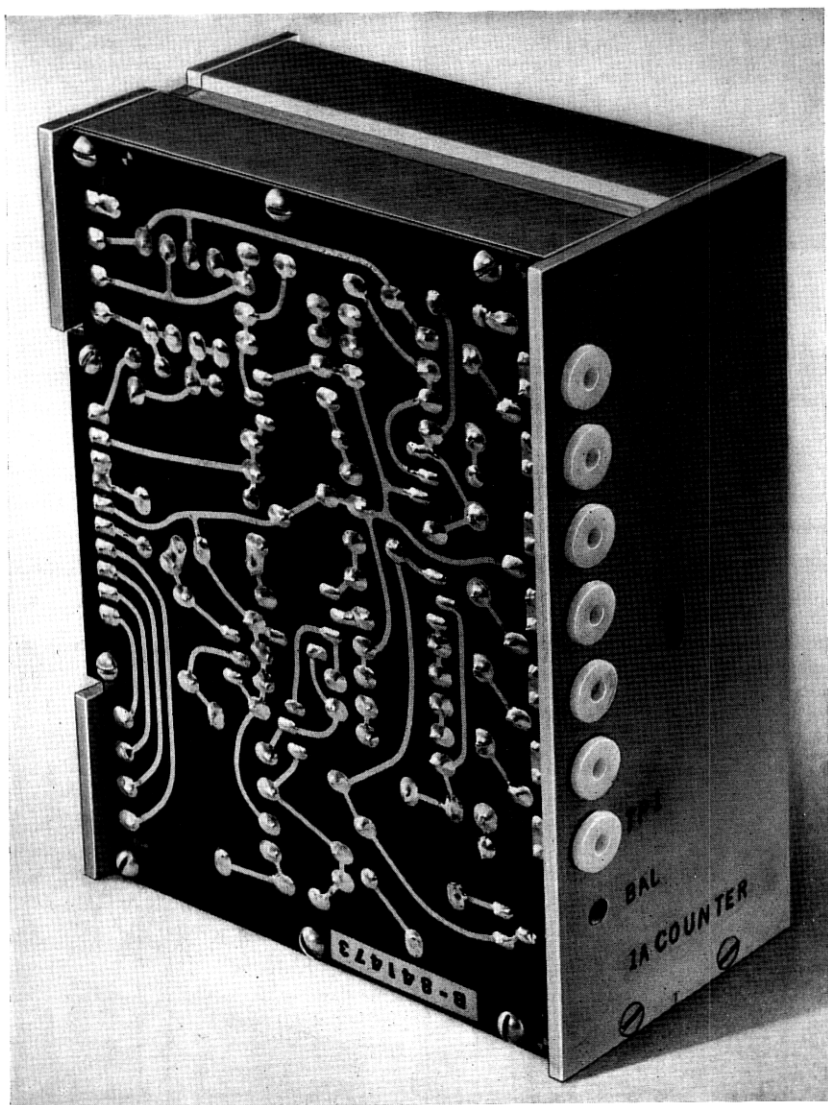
Keyway in edge of plug-in unit, location of plug and shape of unit insure proper positioning and orientation.
